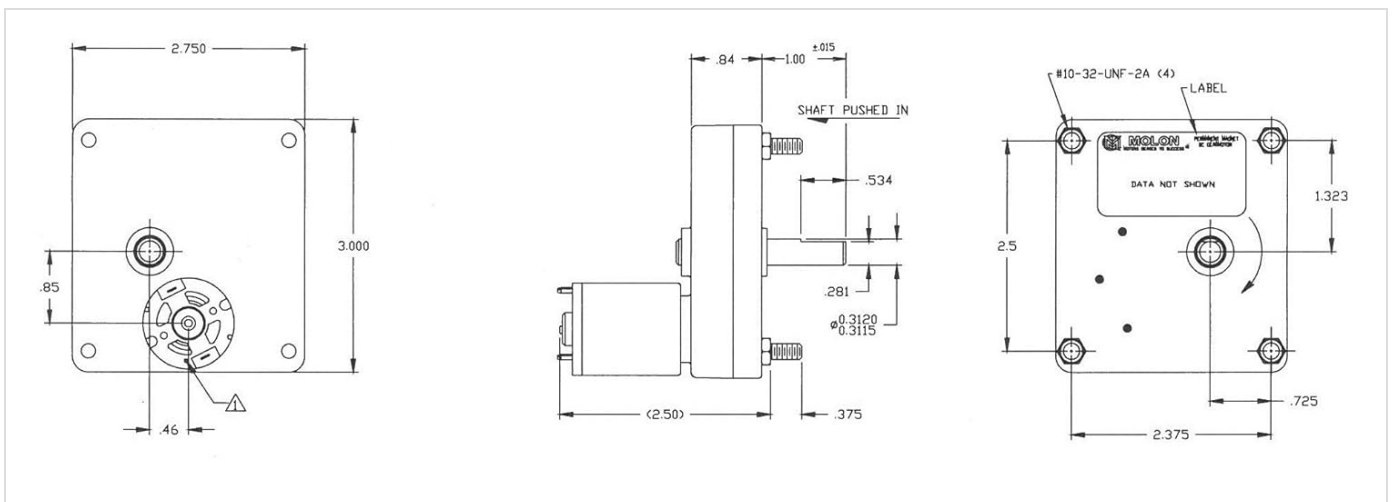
Technical drawing of the Molon CHM-2401-1M Gearmotor, providing detailed dimensions for mounting and integration.
